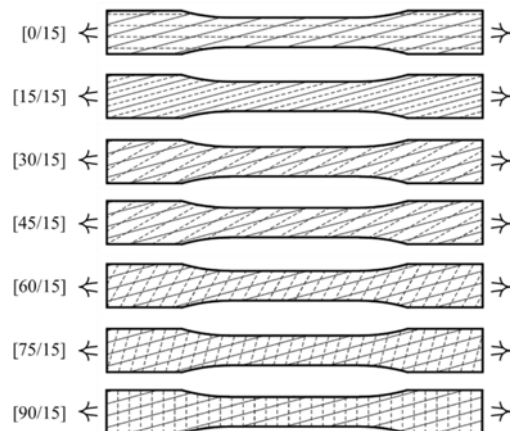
Schematic drawings of 3D printed tensile specimens for asymmetric tool paths based on 15° tool path (A/15°).
